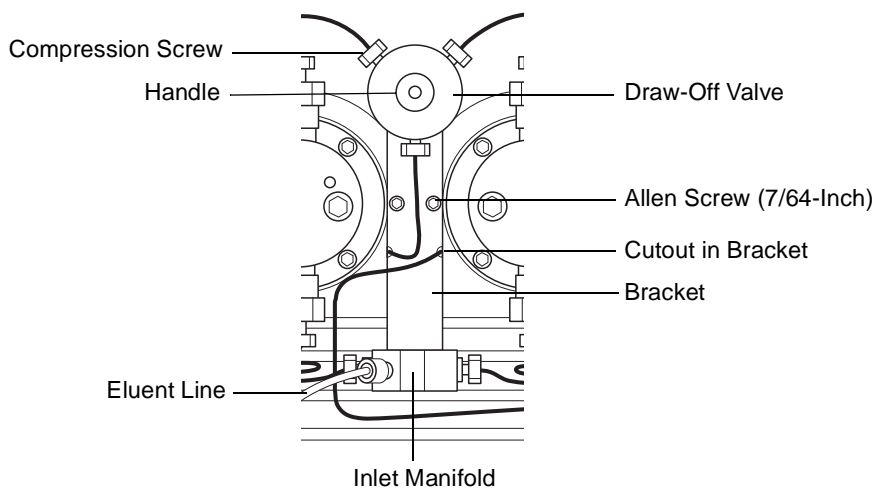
Draw-Off Valve/Inlet Manifold Assembly
